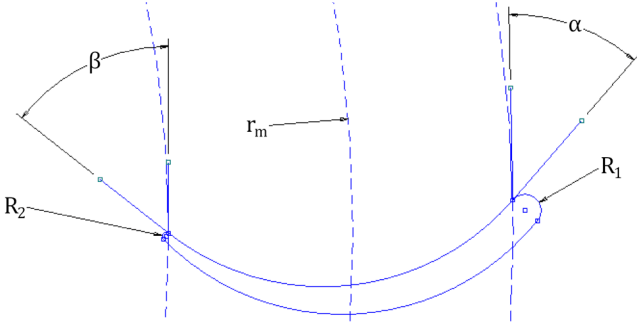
Main view and geometric parameters for the rotor blades of the IFR turbine.
